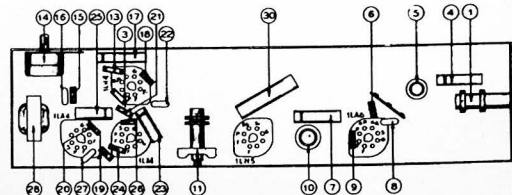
LOCATIONS OF PARTS — UNDERSIDE OF CHASSIS — MODEL 42-123.
